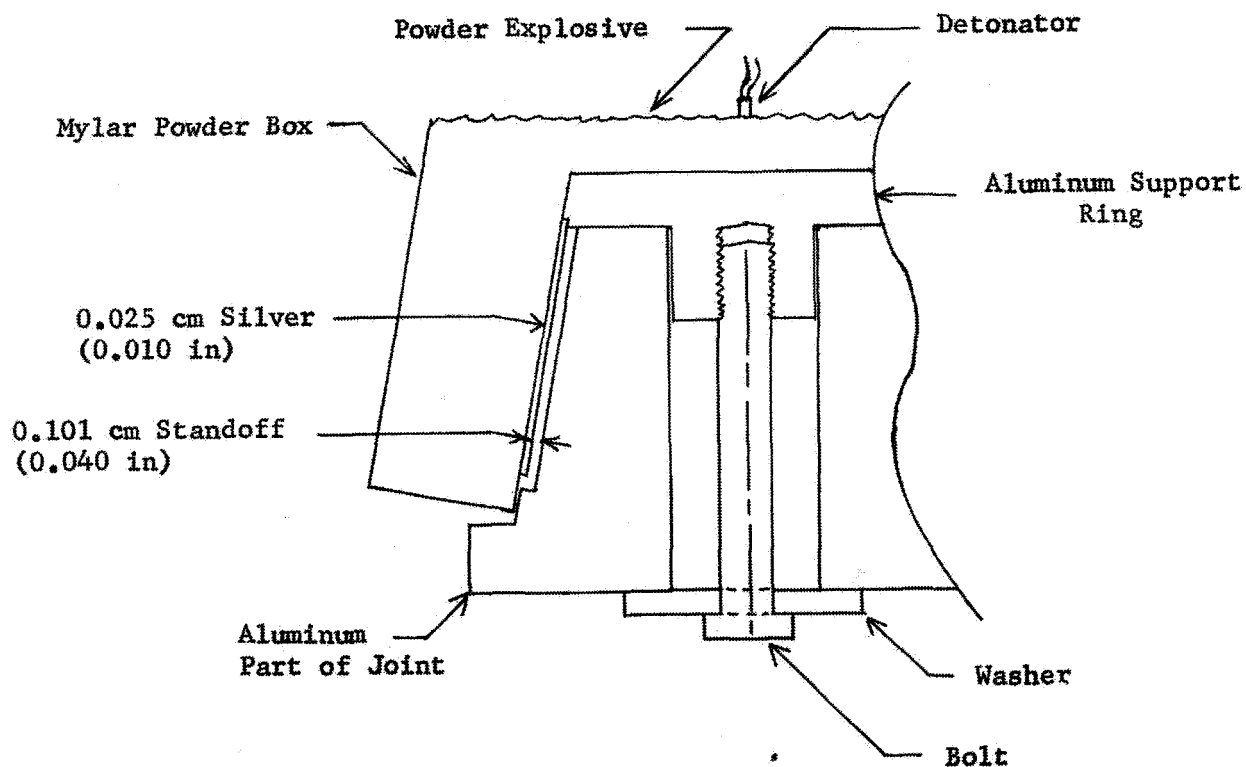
Explosive Bond Joint Production Silver to Aluminum
